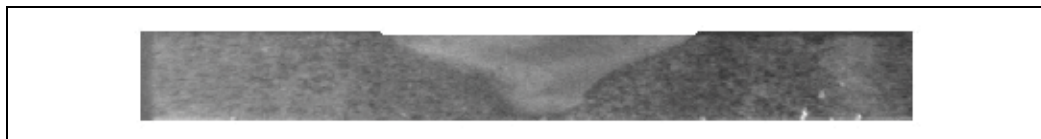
Image of the weld between two 6013 alloy plates.
